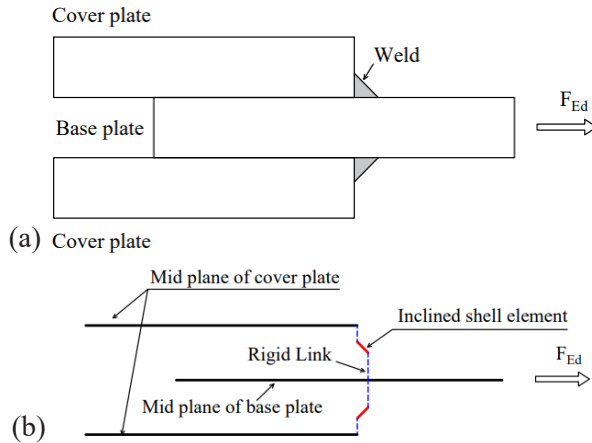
Sample cut with cross weld, (a) structural parts (b) mid plane of the structural parts with weld model
